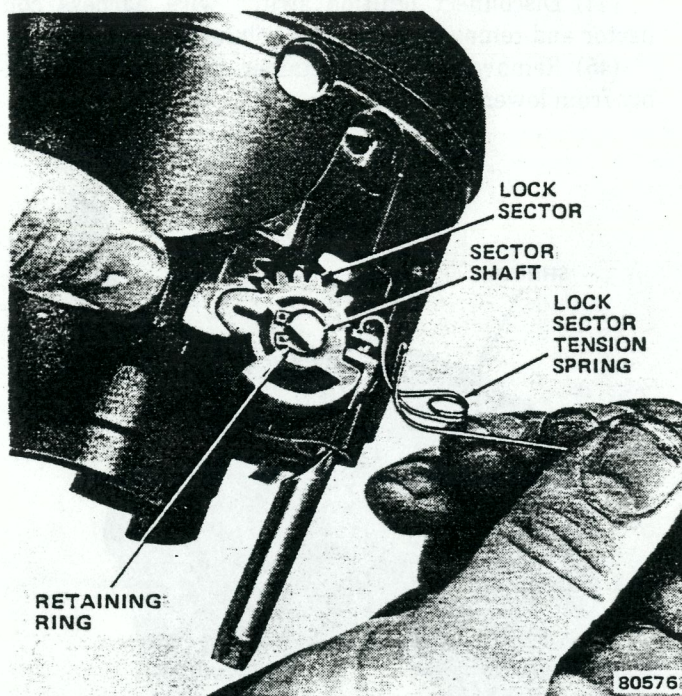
J-55 Lock Sector Tension Spring Removal/Installation
